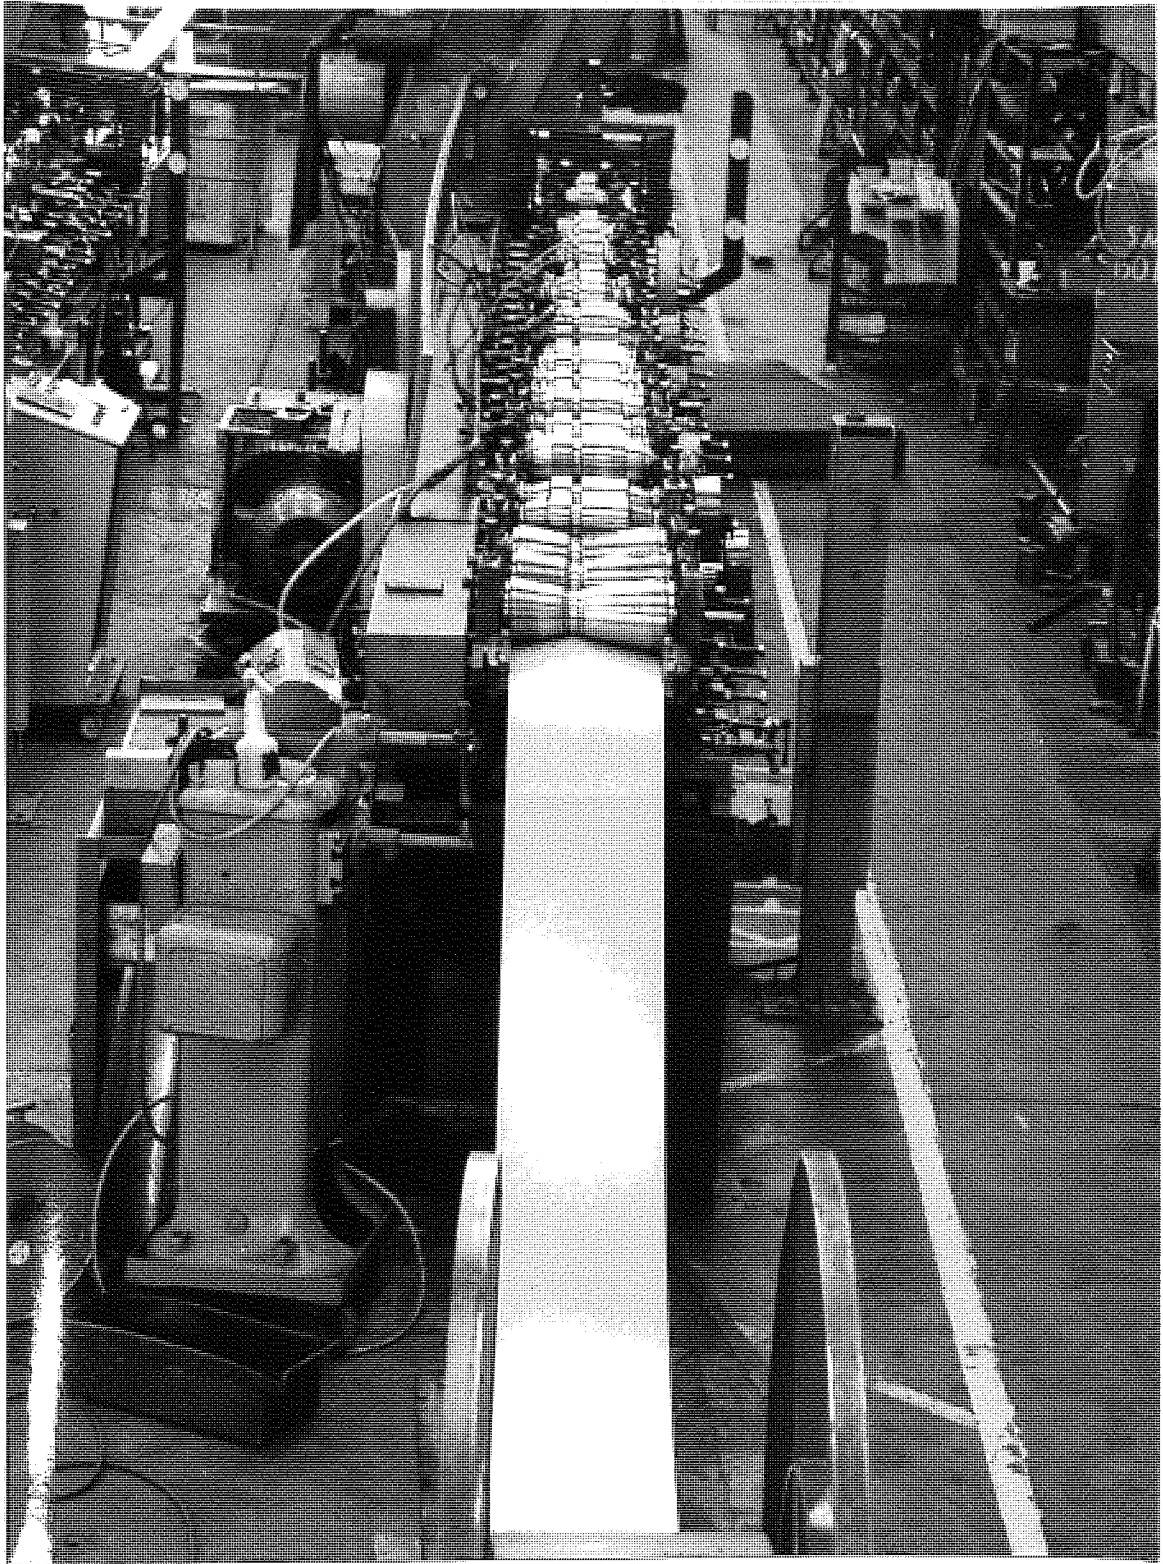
A TYPICAL COLD ROLL-FORMING MACHINE
